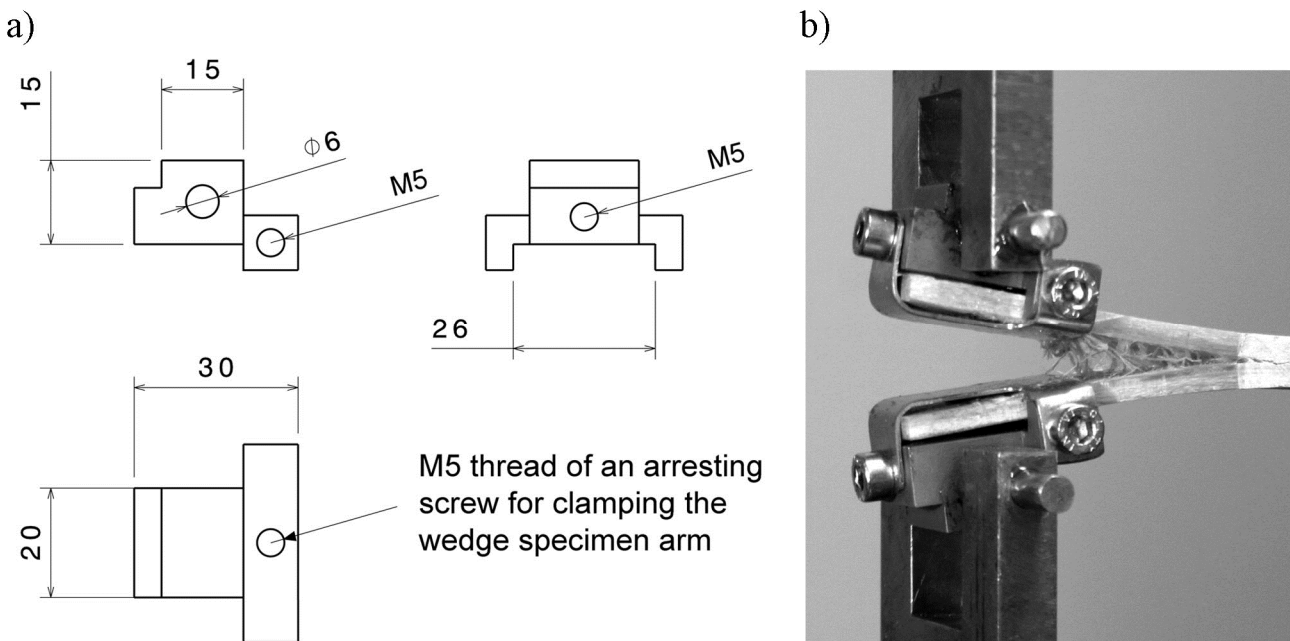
Description of the external load blocks for DCB-X fracture testing: a) main dimensions of an external load block and; b) test setup during DCB-X testing. Dimensions are in millimeters.
